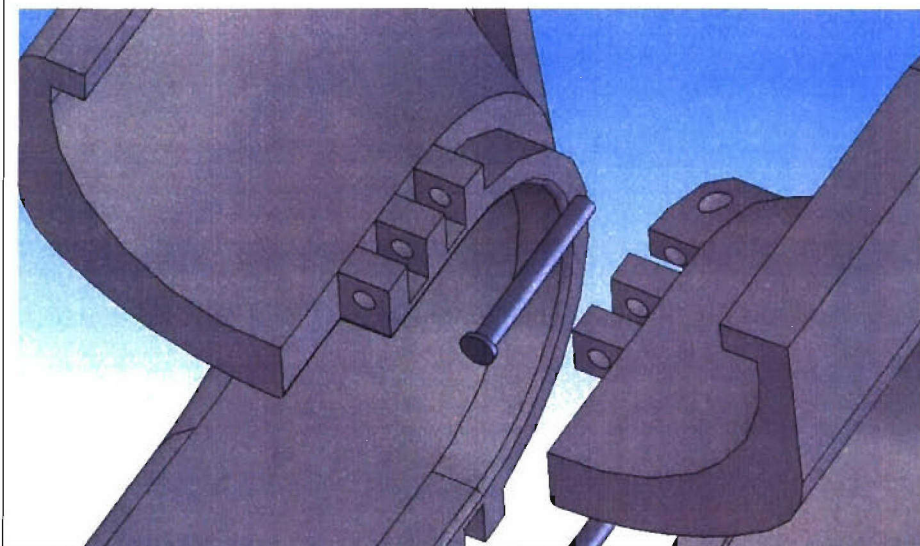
shows an exploded view that depicts how both pieces align so that the pin can be inserted.
